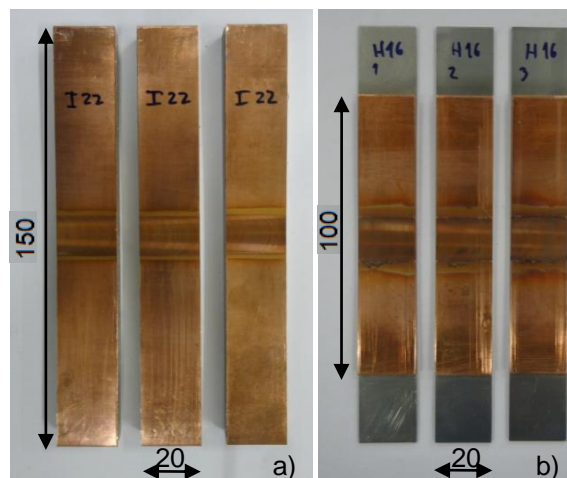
Test specimens. (a) Type 2 joints and (b) Type 1 joints (dimensions in mm).
